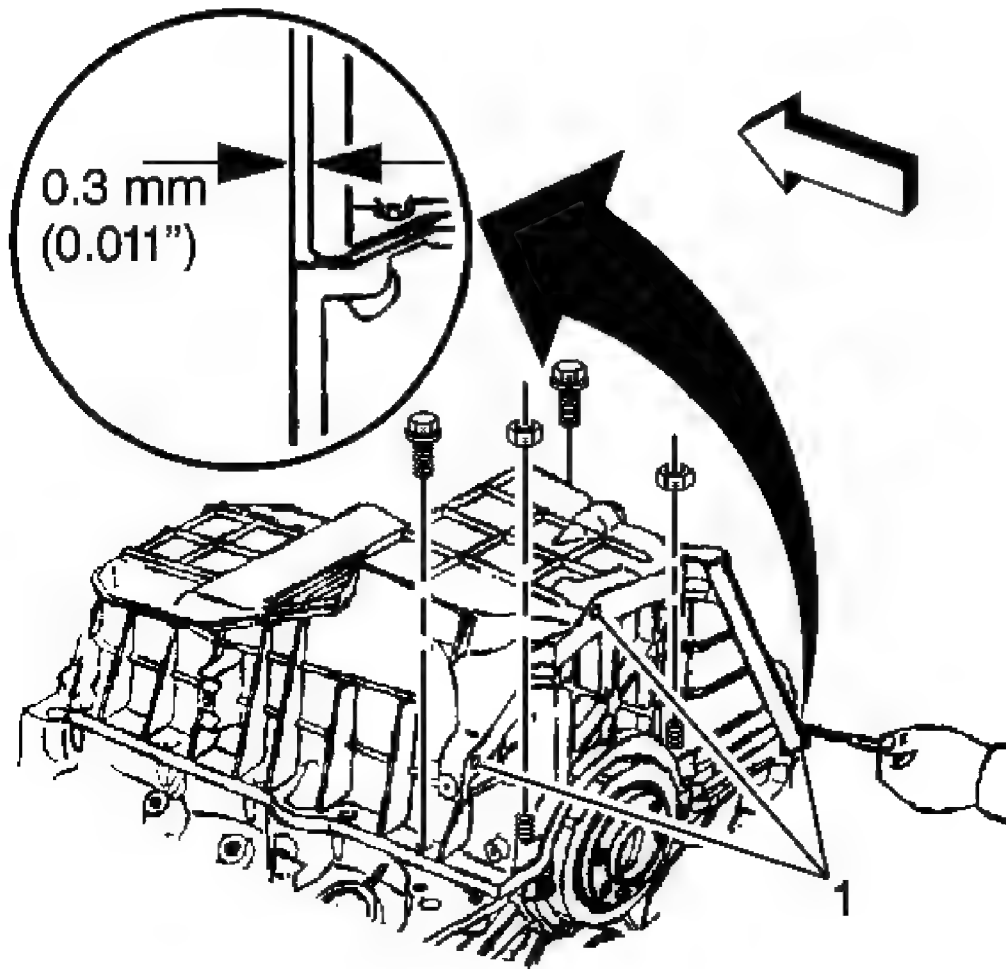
Measuring Pan-To-Transmission Housing Clearance
